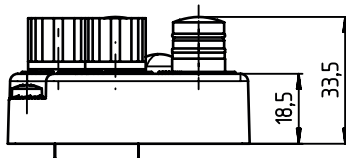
Dimensioned drawing BPS with MK 338 connection hood
